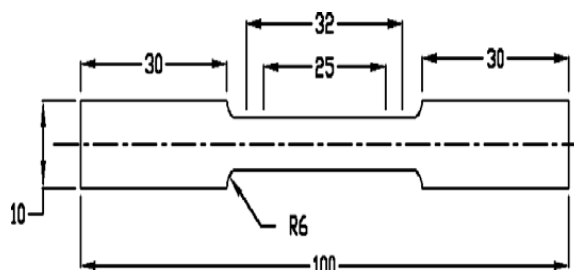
dimension of tensile test specimen as per the ASTM E8 standard
